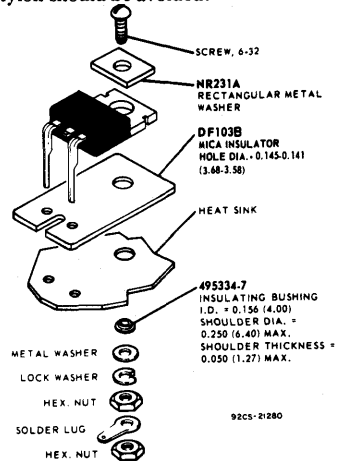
Chassis mounting of JEDEC TO-220AA version of RCA VERSAWATT devices.
